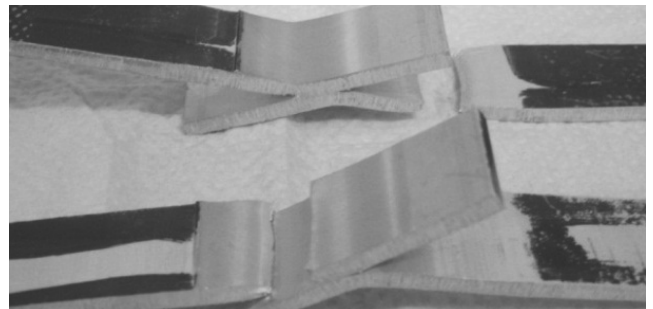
Tensile-shear tested samples of A6060 welds showing fracture in HAZ (top) and in hook region (bottom), after strengthening
